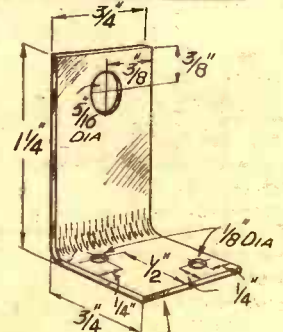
The turret switch is mounted on the panel by means of this bracket, the spindle protruding through a hole in the cabinet side-piece.
